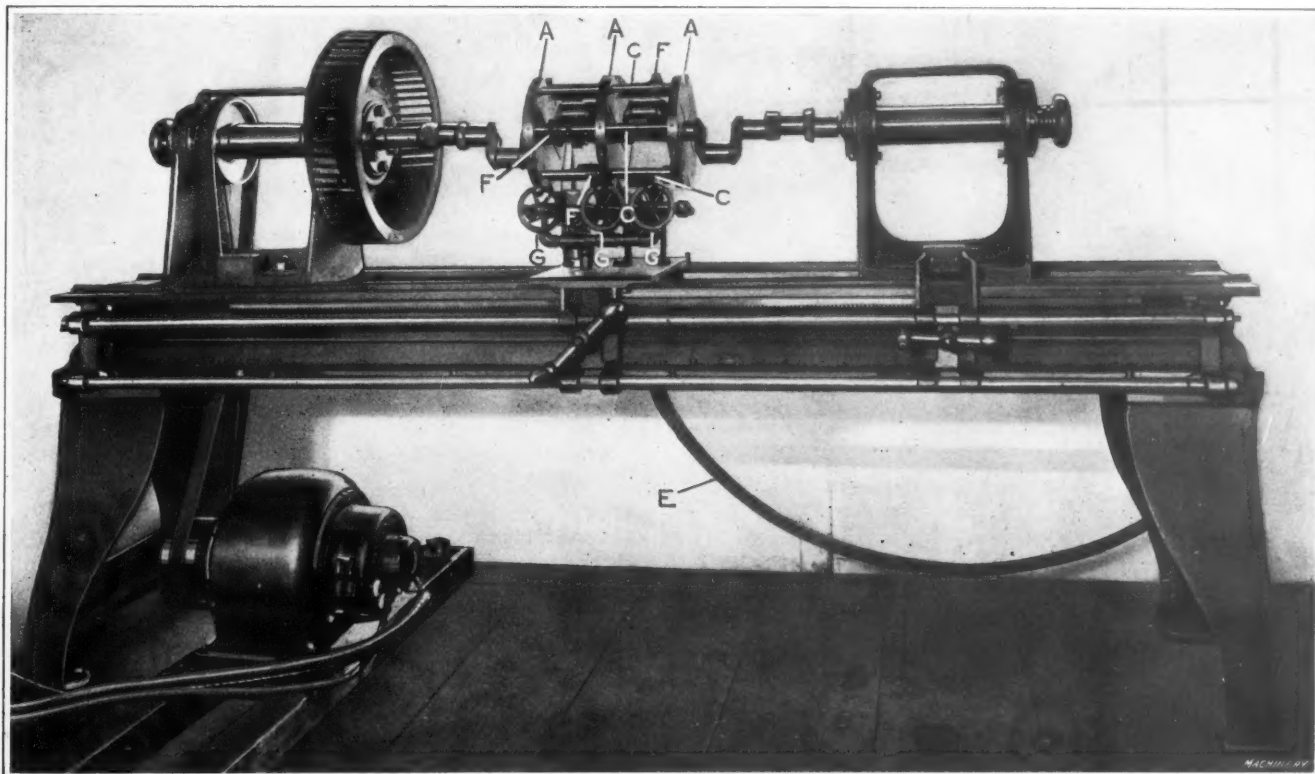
Dynamic Balancing Machine engaged in balancing Crankshaft and Flywheel of Six-cylinder Motor
